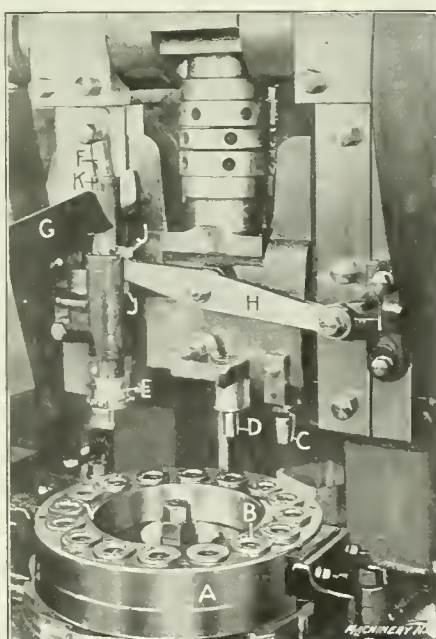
Verifying Machine in which the Reducing of the Shell is completed
